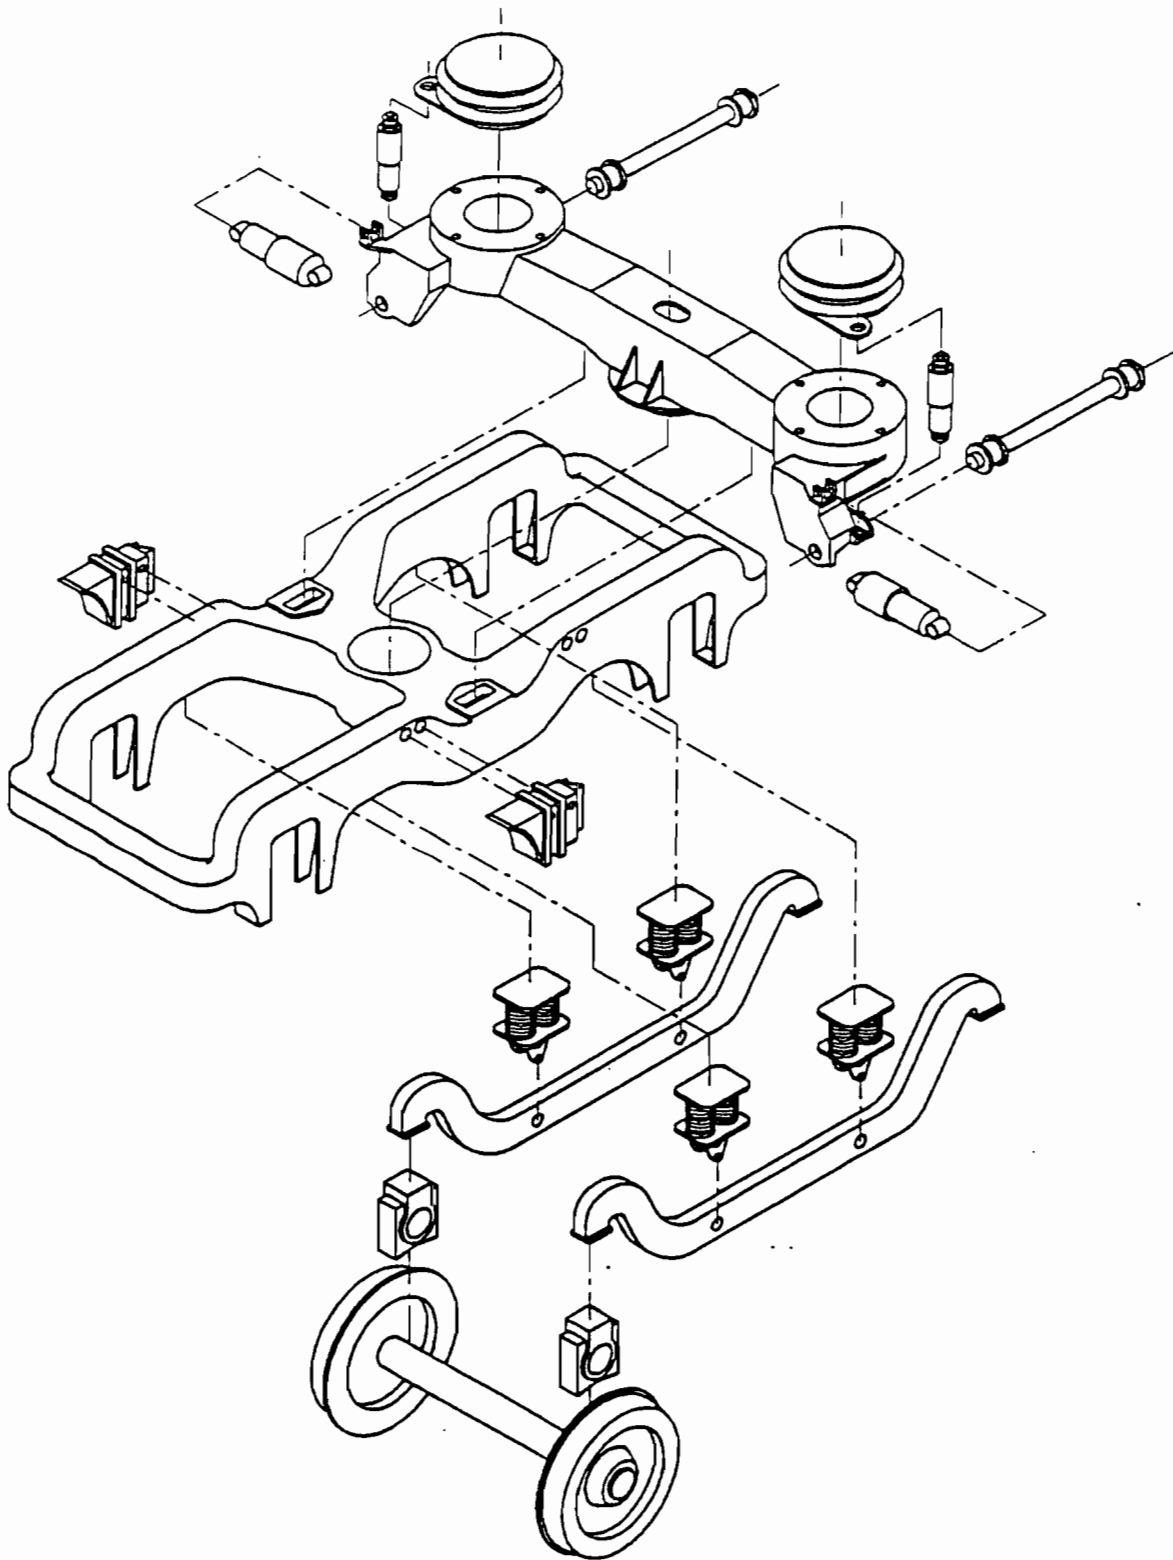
GSI Truck for MBTA Commuter Various Single-Level Cars - Exploded View
